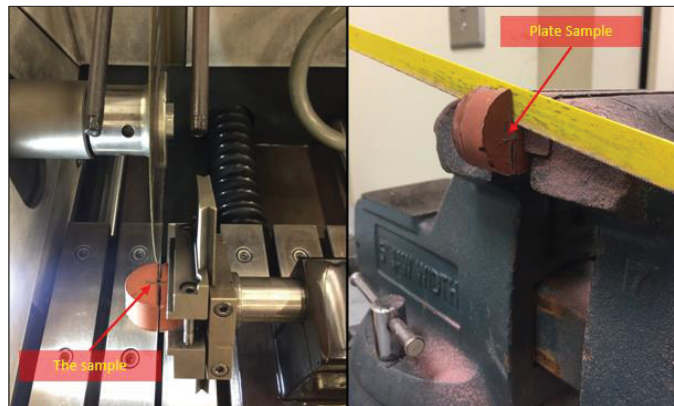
Cutting the cross-section samples manually and using automatic precision cutter.
